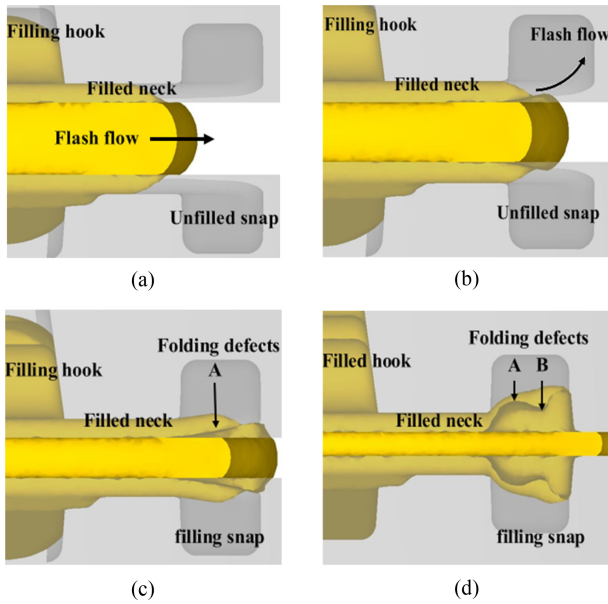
Front view until detection of snap folding defect: (a) Forming stroke 17 mm, (b) Forming stroke 19 mm, (c) Forming stroke 20 mm, and (d) Forming stroke 22 mm
